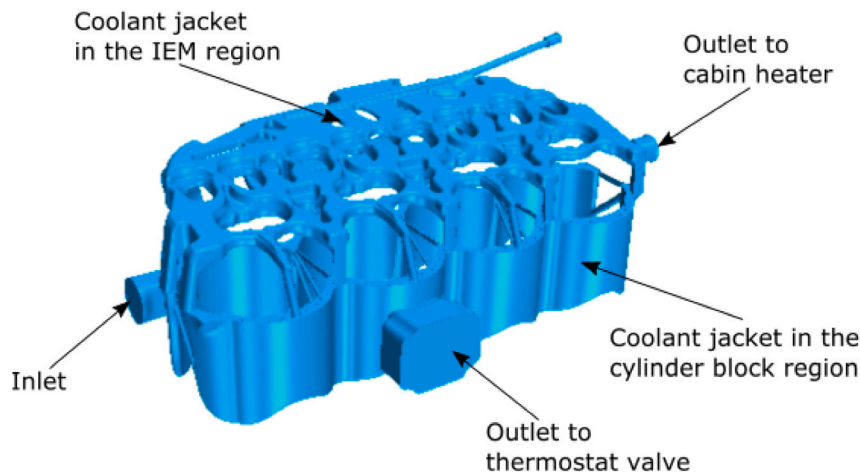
Coolant jacket geometry in the cylinder block and Integrated Exhaust Manifold (IEM) regions with the inlet and the outlets indicated.
